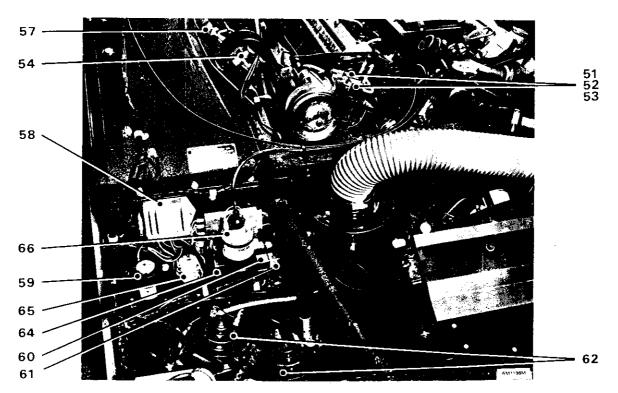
Engine Compartment – R.H. Front Side
